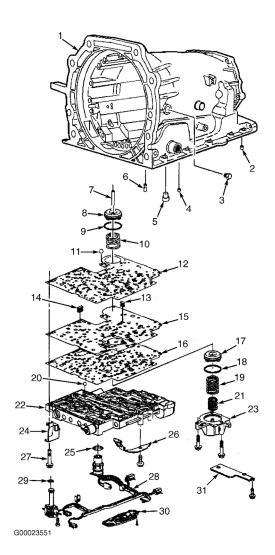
Exploded View Of 4L60-E Transmission External Components (1 Of 2) Courtesy of GENERAL MOTORS CORP.
